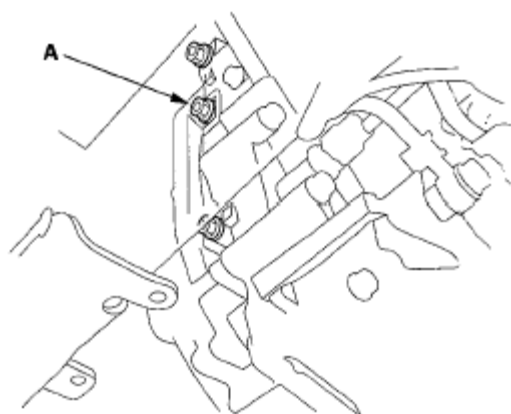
Identifying Line Pressure Inspection Port And A/T Oil Pressure Gauge Set
